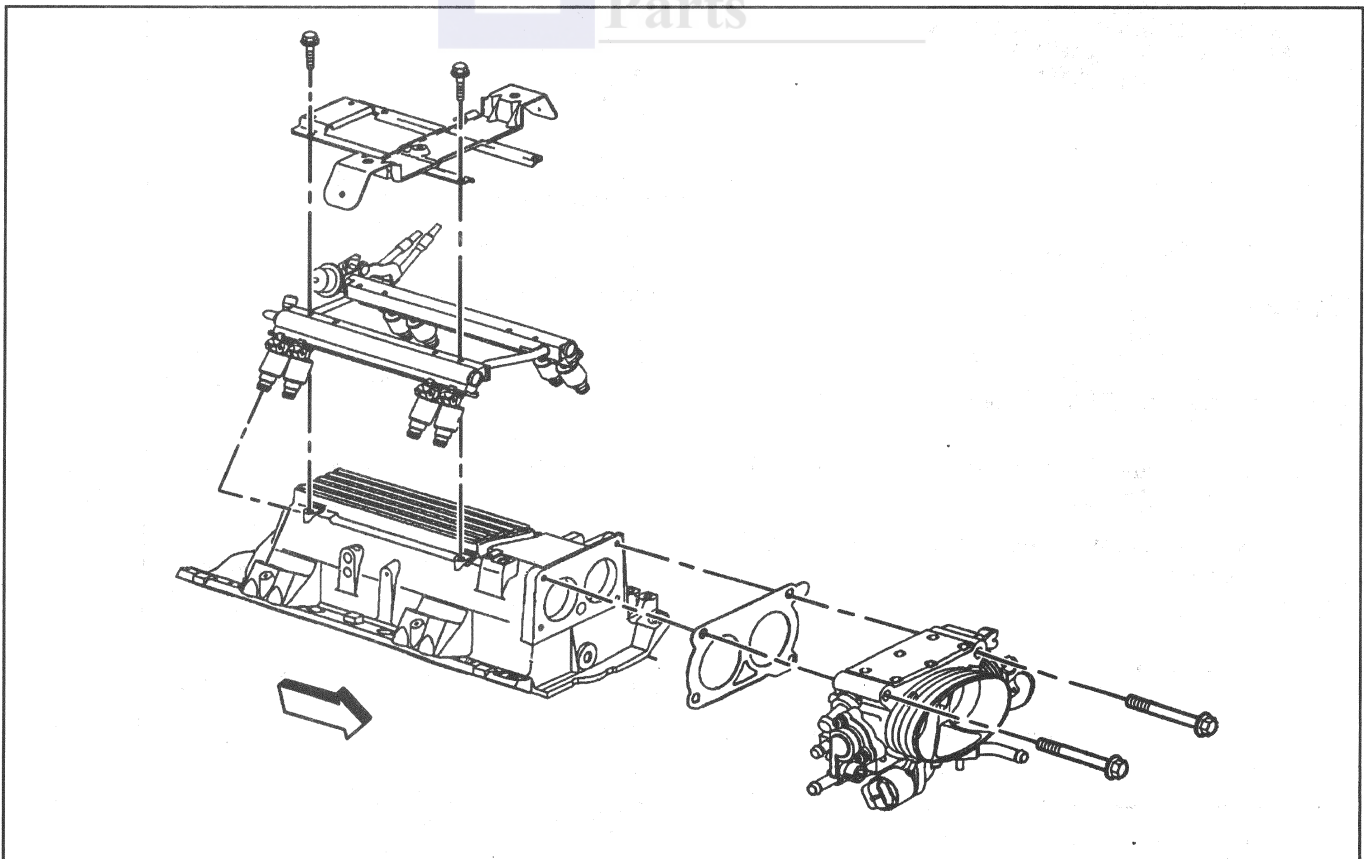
Intake Manifold, Fuel Rail, Throttle Body, and Air Cleaner Resonator Bracket
